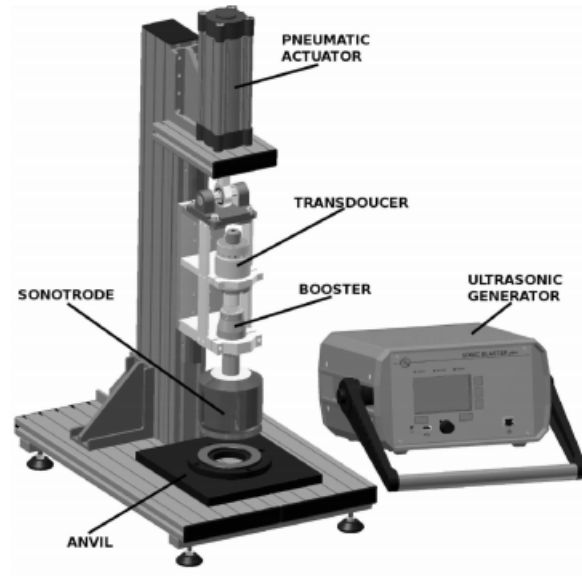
Simplified model of an Ultrasonic Welding Machine
